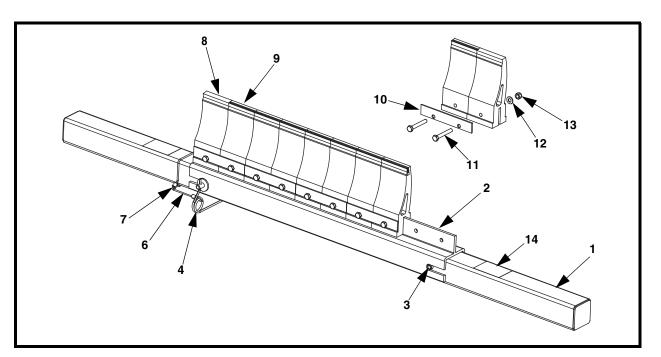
Martin[®] SQC2S[™] Cleaner Assembly with 3-in. Martin[®] SAF2[™] Style Blades, P/N SQC2S-XXXXXX3XXX
